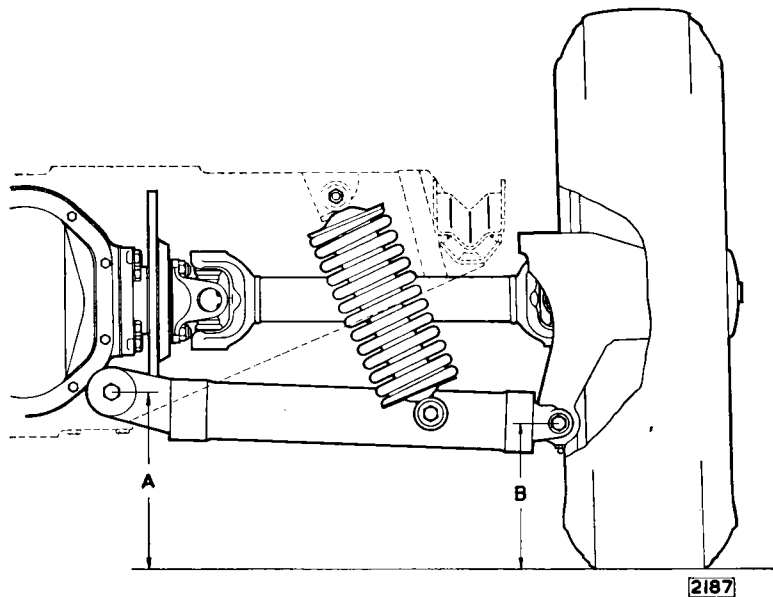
When checking the rear wheel camber angle A minus B must be $2\frac{13}{32}$ " (6.11 cm.)
